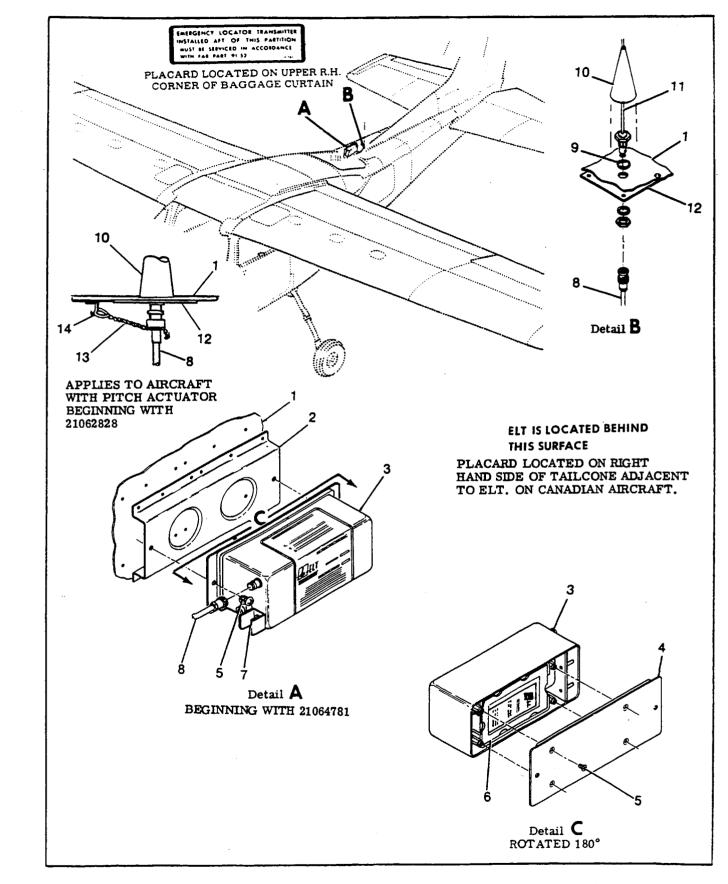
Emergency Locator Transmitter Installation (Sheet 3 of 3)
